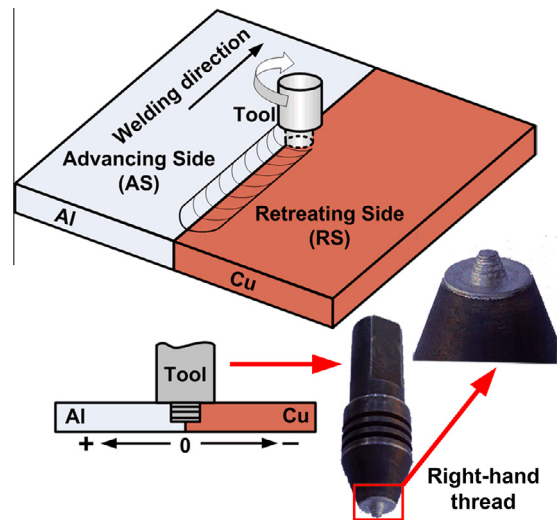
Schematic of friction stir welding process and configuration of used tool.
